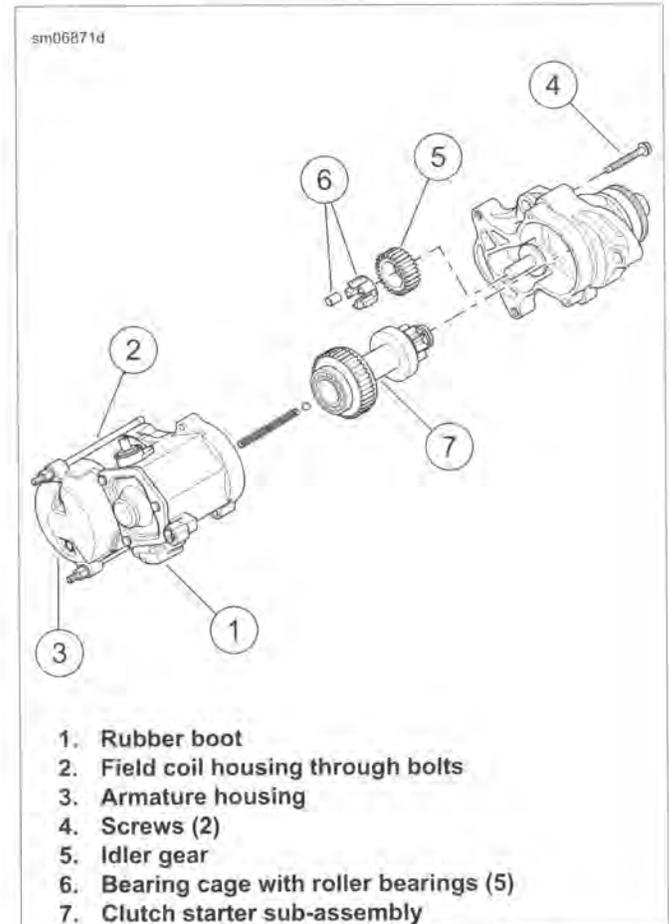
Clutch Starter Sub-Assembly and Housing
